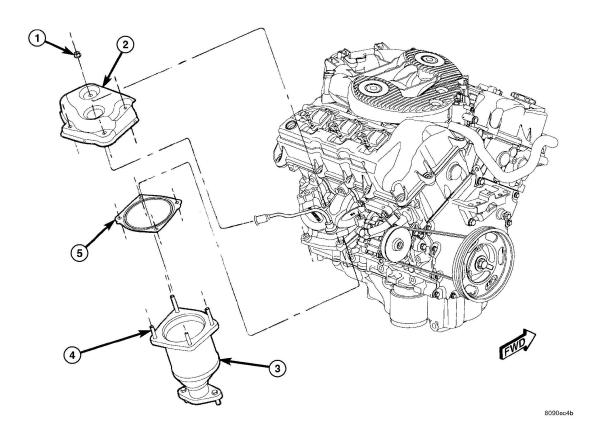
Identifying Rear Catalytic Converter - 2.7L Courtesy of CHRYSLER LLC
